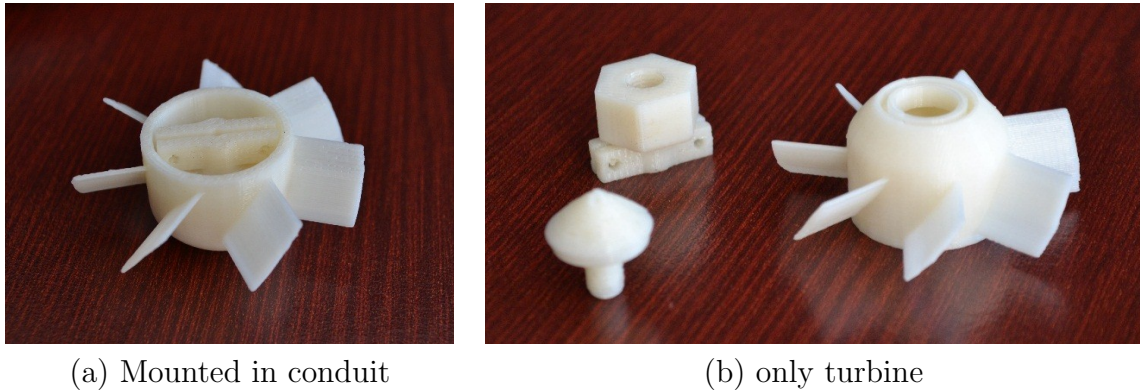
J1-2 turbine rapid prototype in ABS material. (a) assembled ; (b) exploded.
